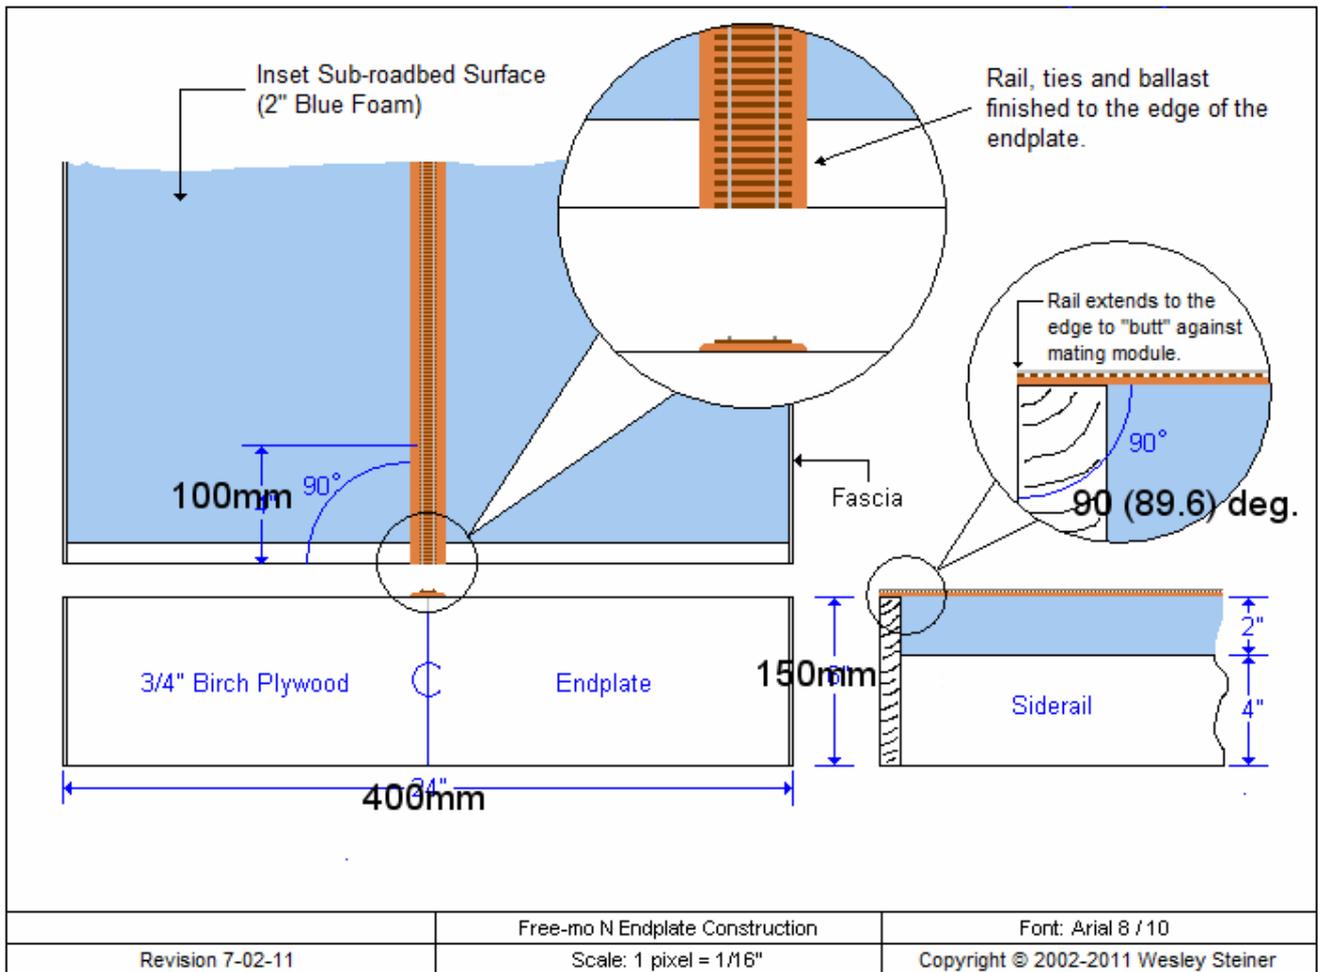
Insert diagram of end plate profile & tolerance, above is place holder example
